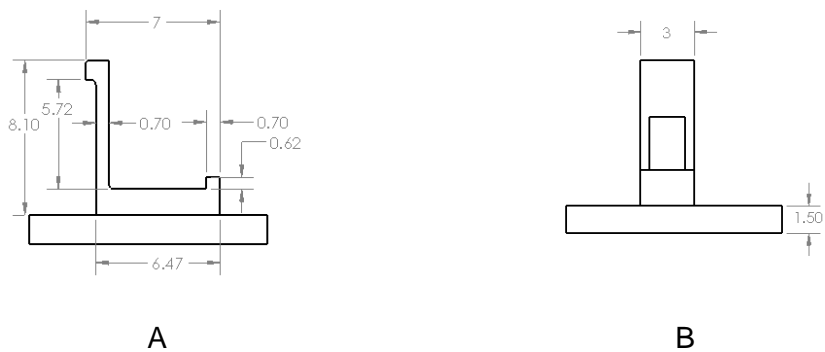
Dimensions (*mm*) of the horizontal force sensing structure. A, Front view. B, Side view
